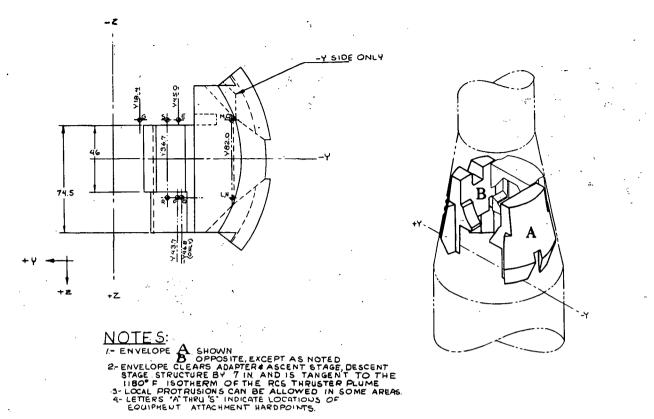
LEM Descent Stage Structural Arrangement
